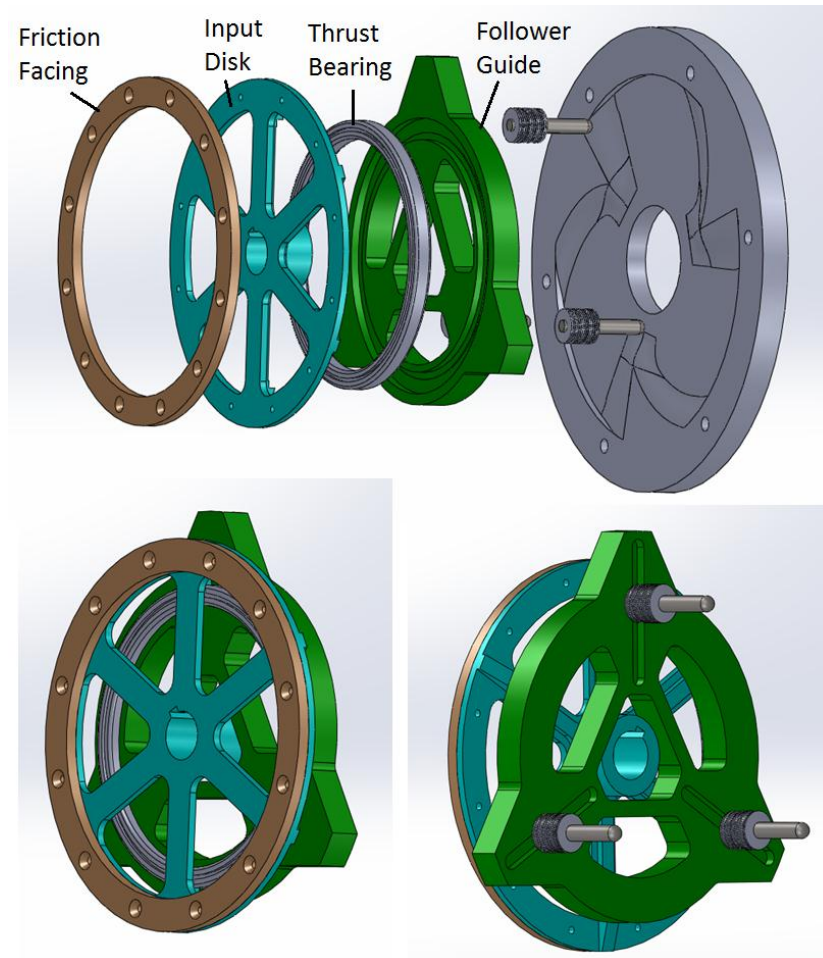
Input disk assembly. Control linkage and ground plate not shown in exploded view.
